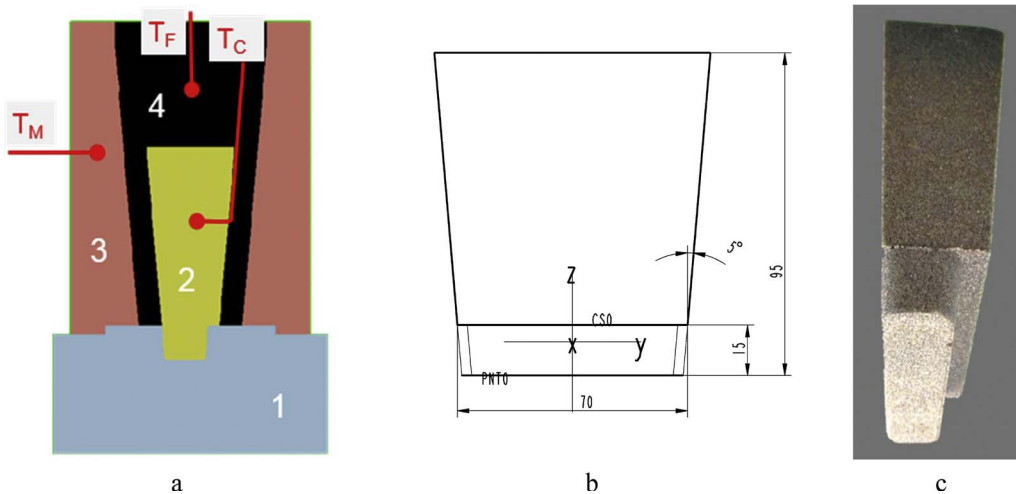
Test core geometry and mould setup. (a): Schematic cross section through the mould setup consisting of (1) a base plate, (2) a core, and (3) the upper mould part. The casting is formed in the cavity (4). The thermocouple positions are: T_M in the mould, T_C in the core centre, and T_F in the feeder centre. (b): Test core main dimensions and (c) realised core.
